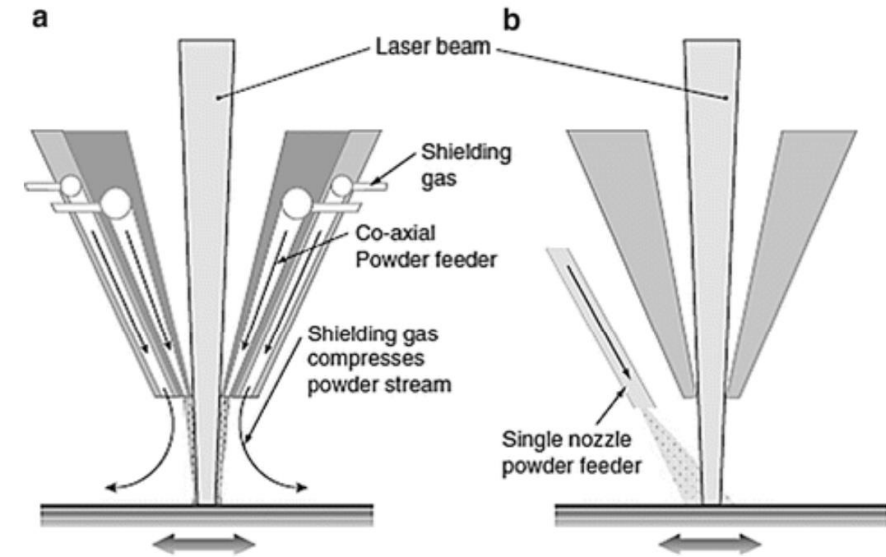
Illustration of powder nozzle configurations: (a) coaxial nozzle feeding and (b) single-nozzle feeding
